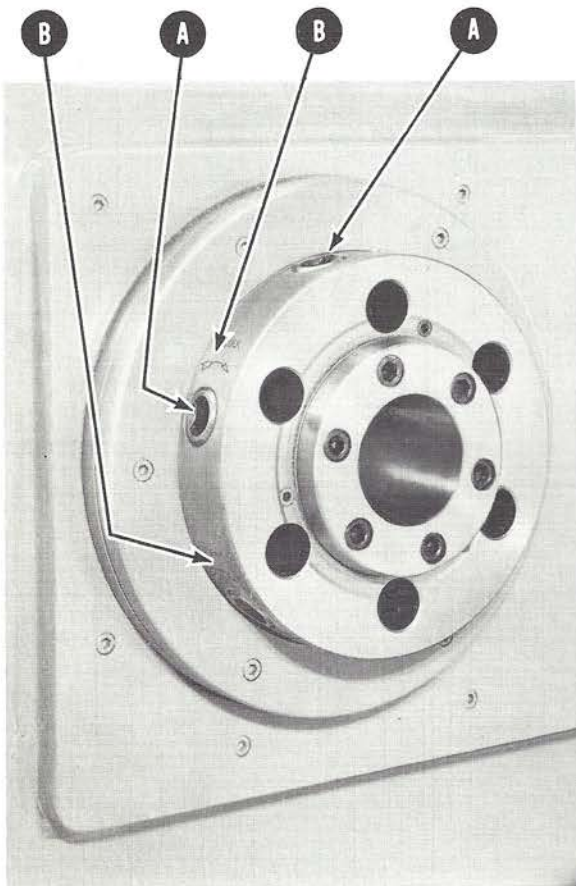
612 LATHE AMERICAN STANDARD CAMLOCK SPINDLE NOSE
